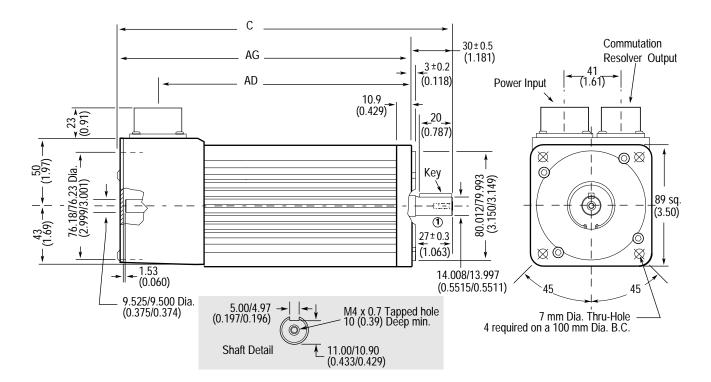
Motor Dimensions - 1326AS-B3 Series Servo Motor
